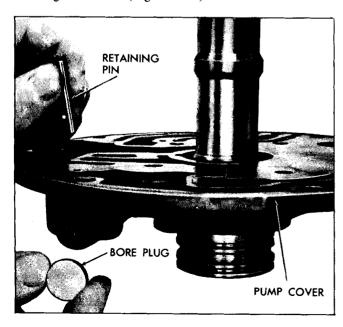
E-105 Removing Retaining Pin and Bore Plug
